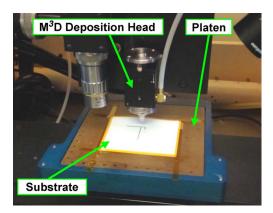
Direct-write printing of the antenna on paper using the M^3D machine. The M^3D fixed head and movable platen can be seen.
